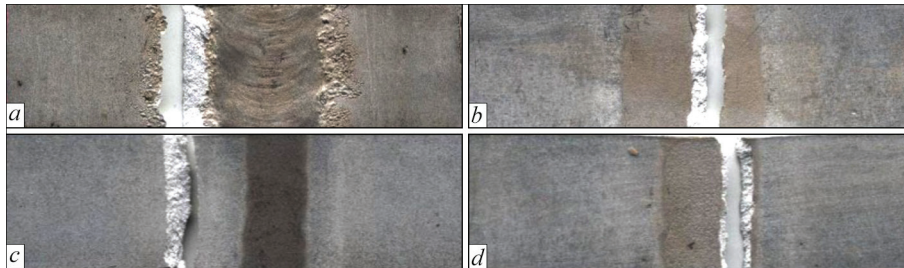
Appearance of the face (*a, c*) and root (*b, d*) surfaces of the working part of GTA welded specimens of 2 mm MA2-1M magnesium alloy with weld reinforcement (*a, b*) and without it (*c, d*)
